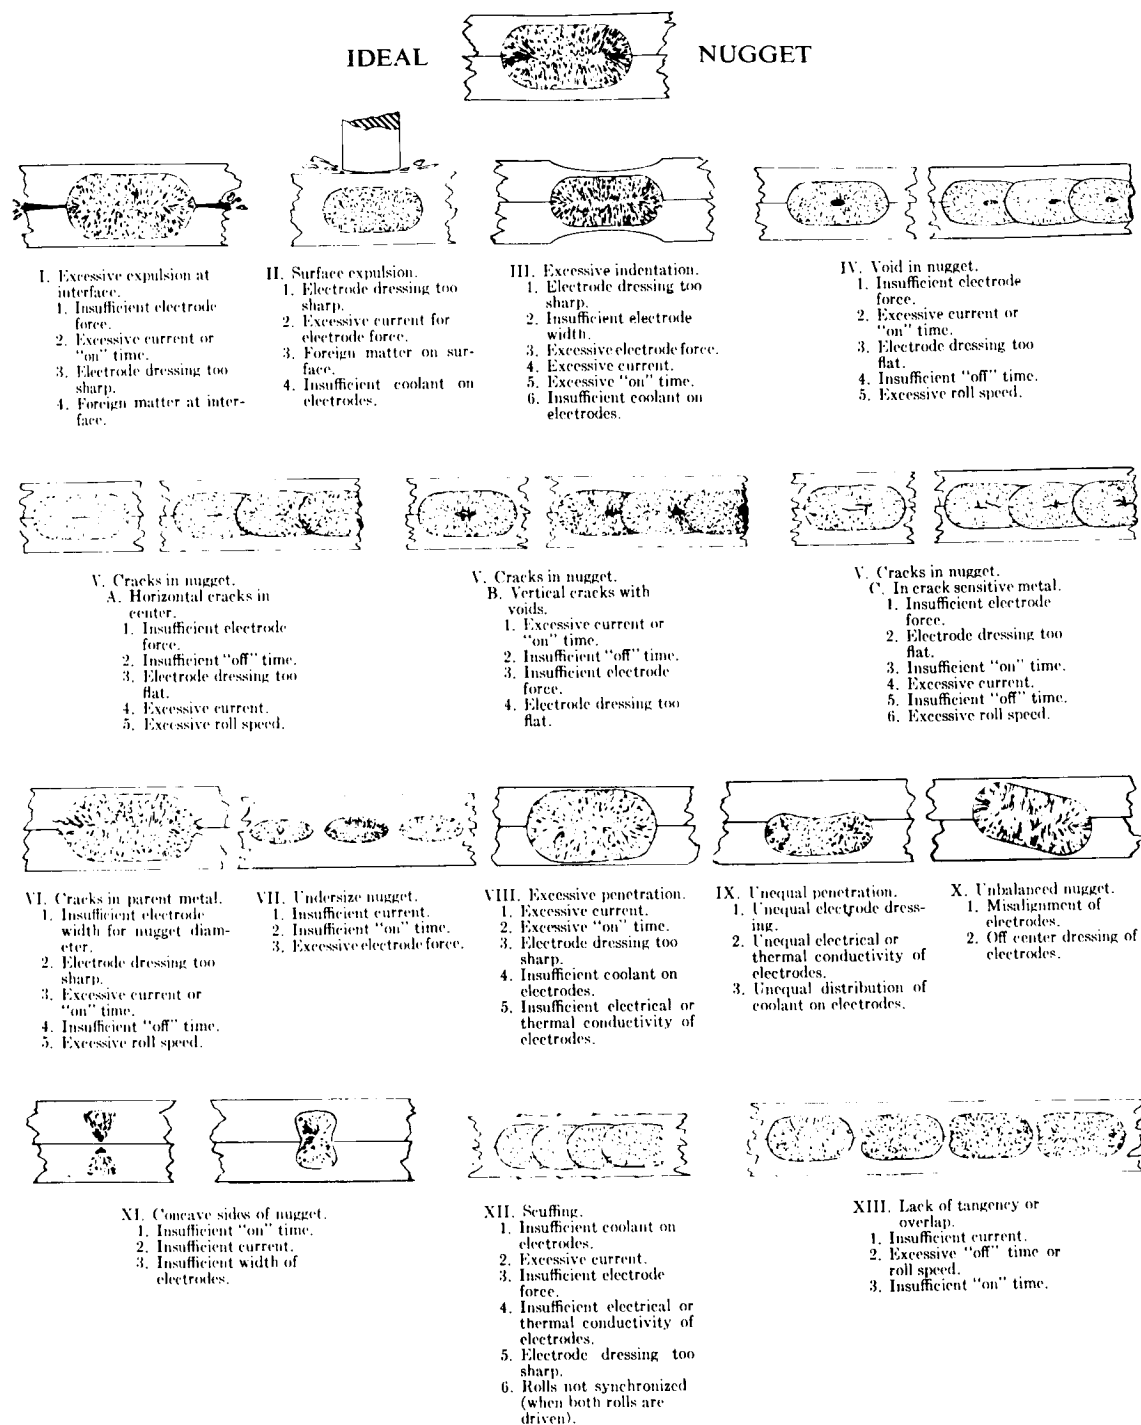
COMMON DEFECTS IN RESISTANCE SPOT AND SEAM WELDS AND THEIR CAUSES (REF. 89)
